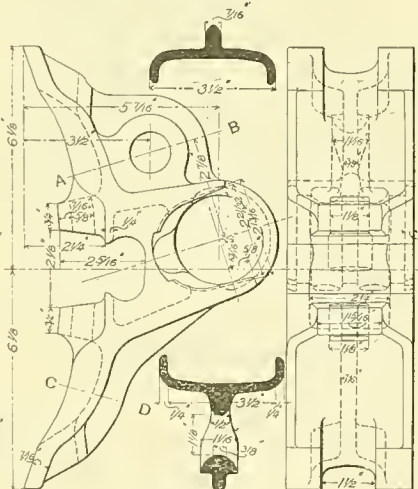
BOLSTER GUIDE-CASTING.
